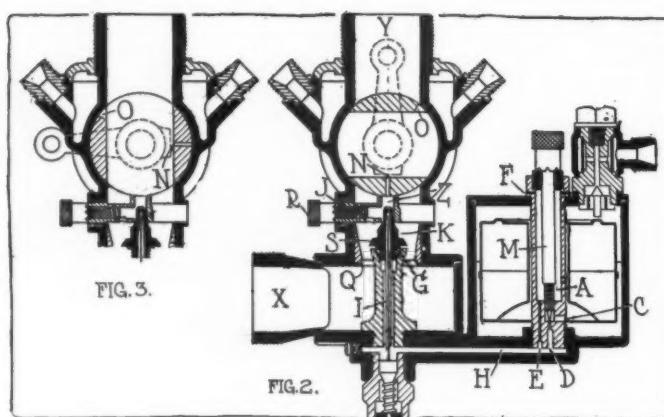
Vertical section through Longuemare carbureter showing throttle closed. Fig. 3—Section through spray chamber, with throttle open
